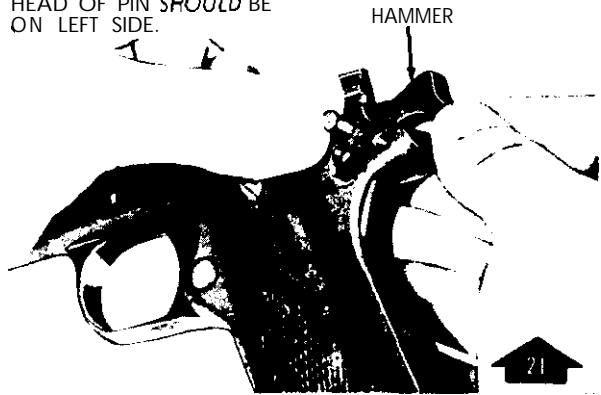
Disassembly/assembly of receiver group (2 of 7).
